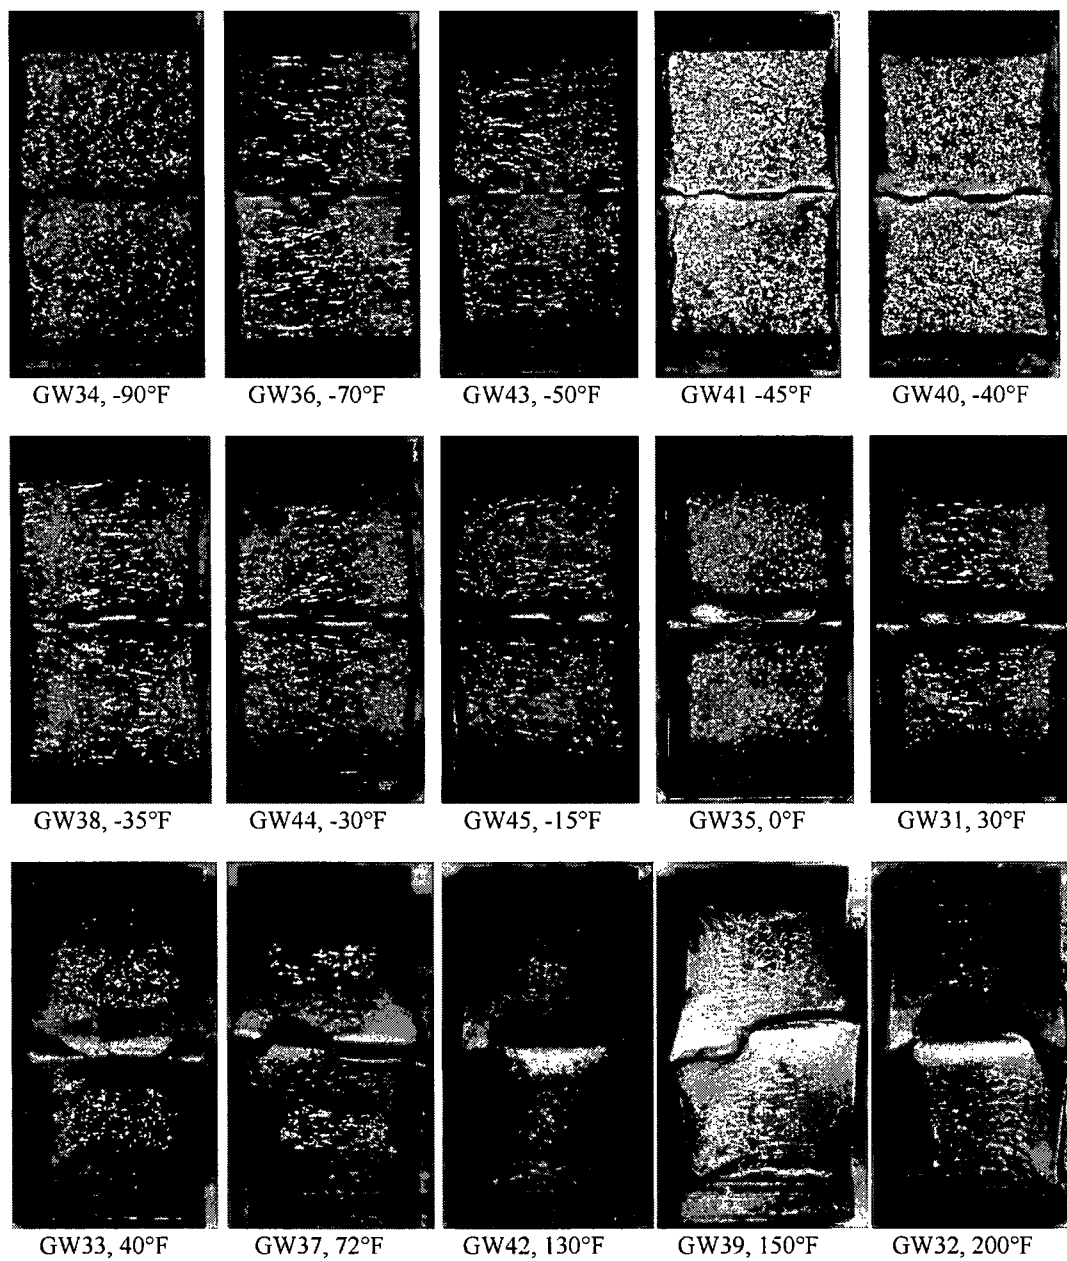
Charpy Impact Specimen Fracture Surfaces for the South Texas Unit 1 Reactor Vessel Surveillance Program Weld Metal (Heat # 89476)
